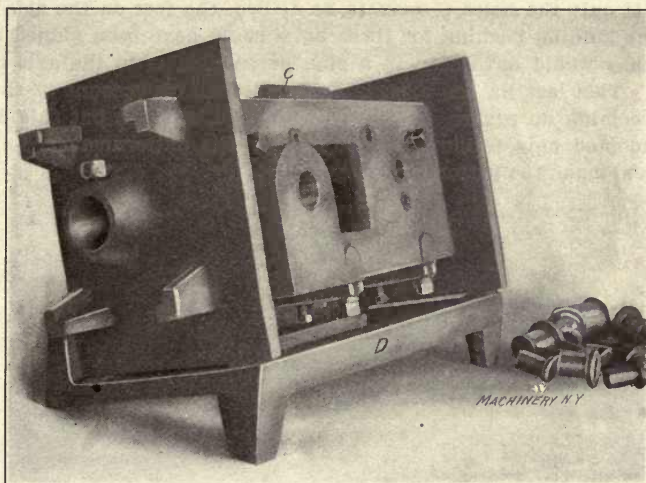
Jig in Fig. 107 in Position for Drilling Holes at an Oblique Angle with Jig Base
